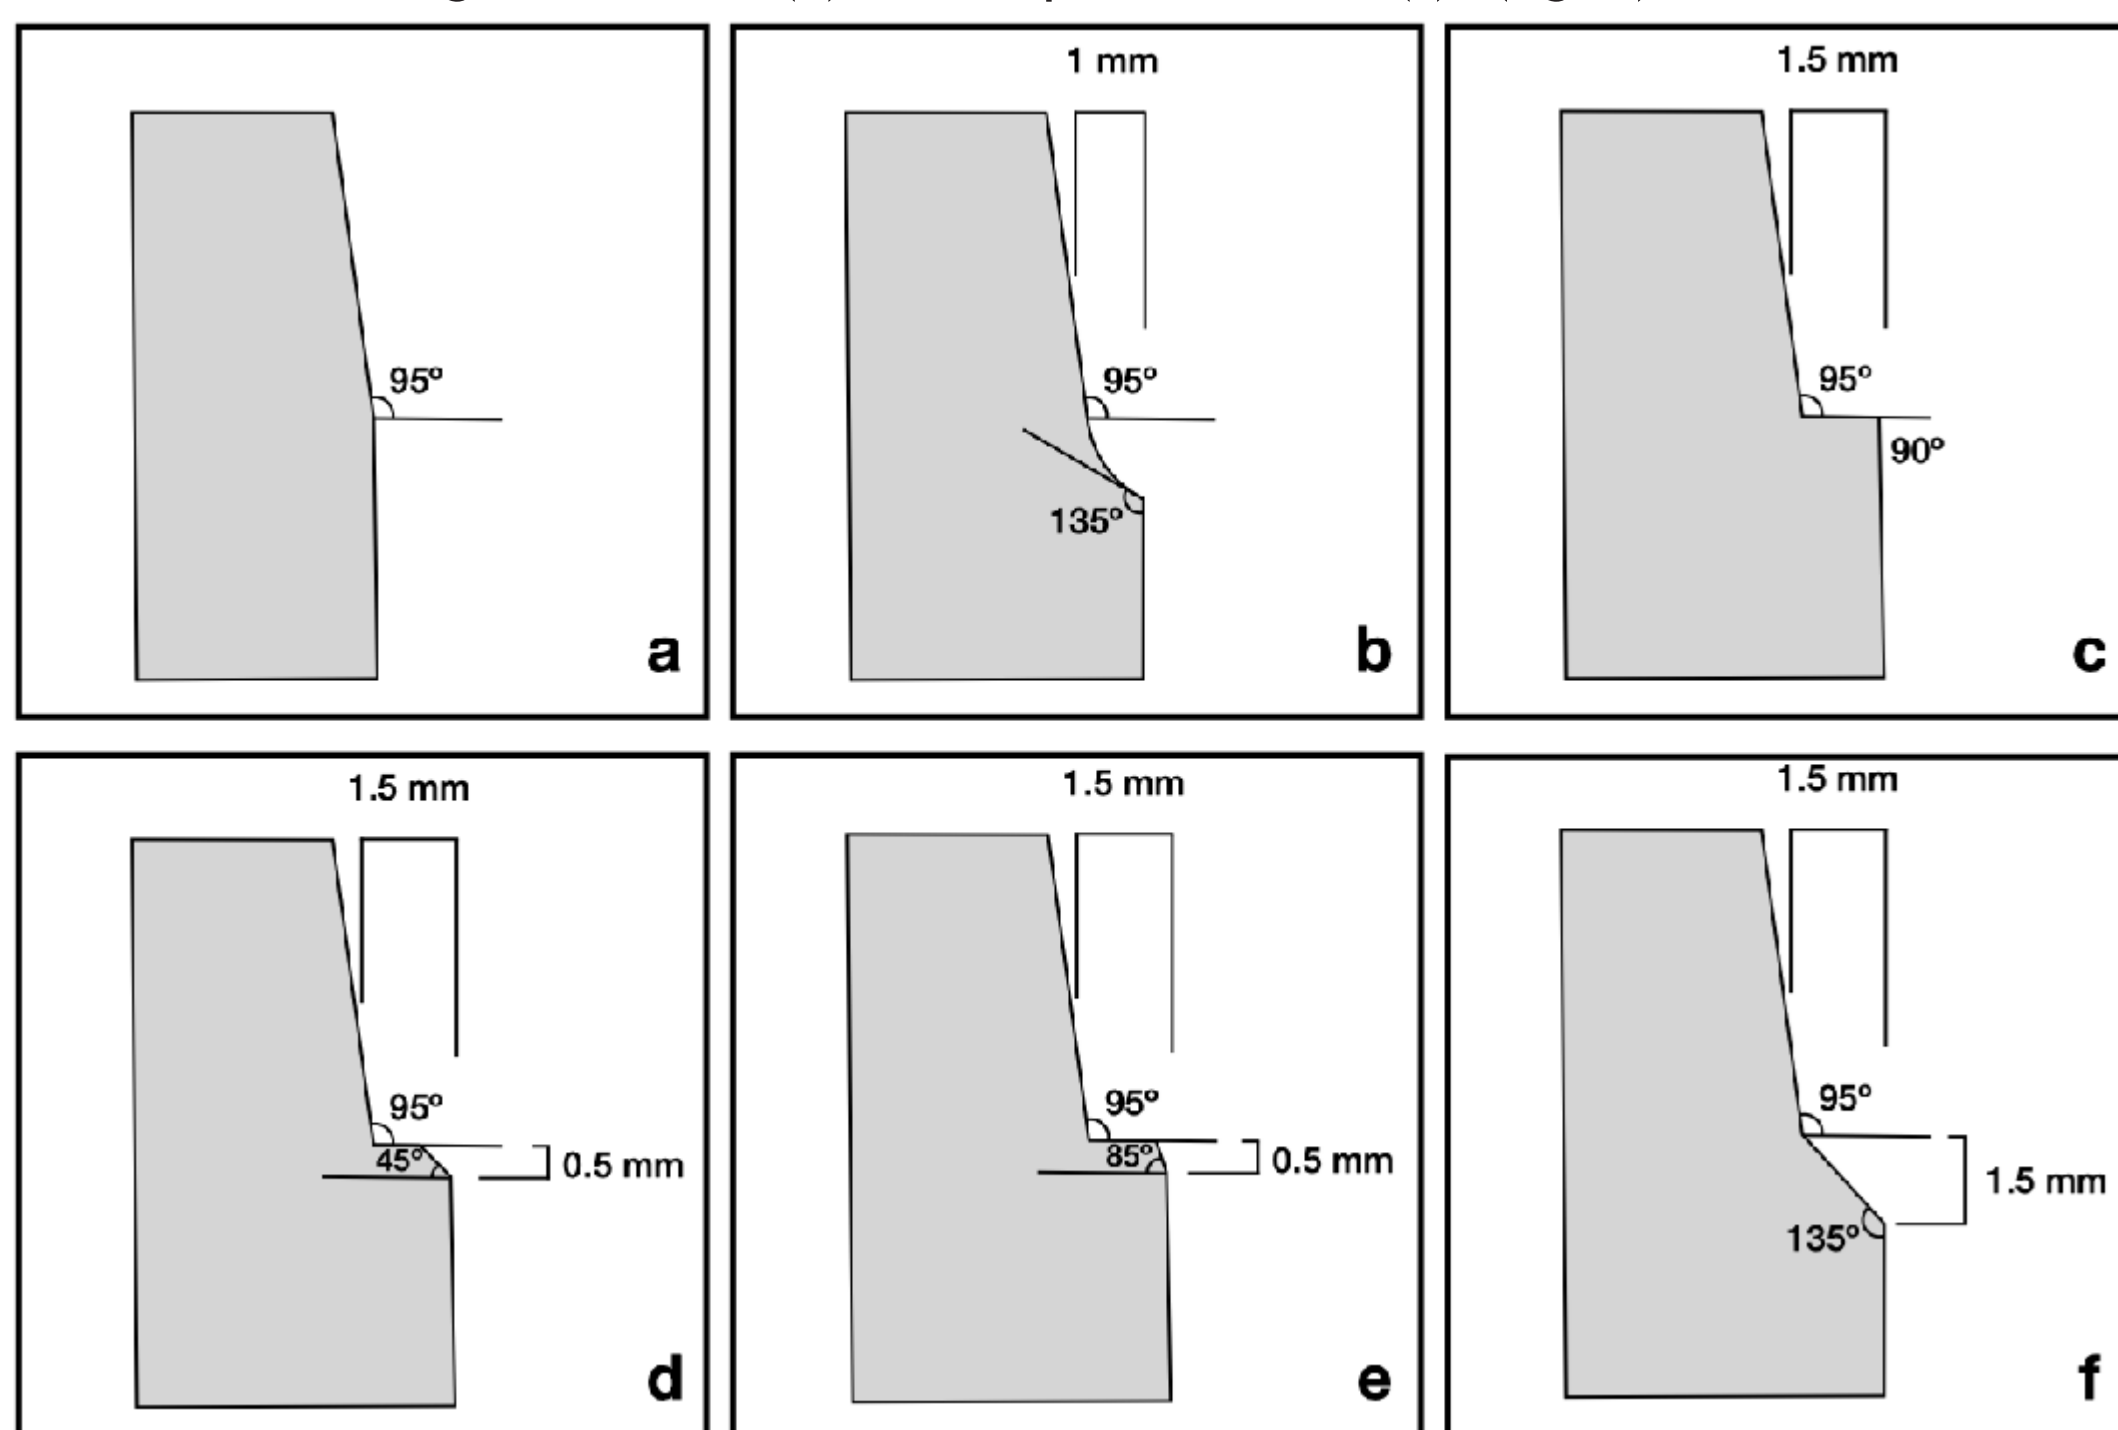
Finish lines made of steel cylinders. a. Knife edge; b. Chamfer; c. Straight shoulder; d. 45° beveled straight shoulder; e. 85° beveled straight shoulder; f. Sloped shoulder
